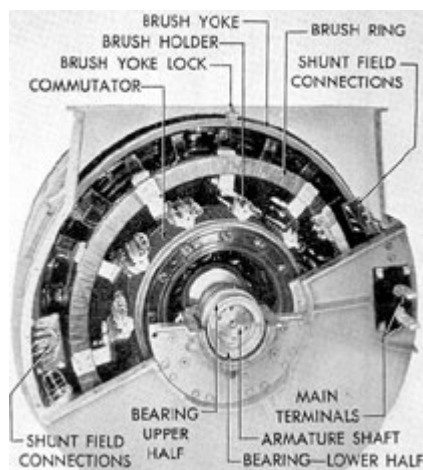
Commutator end of G.E. main generator, with cooler, end bell, and upper half of bearing housing removed.
